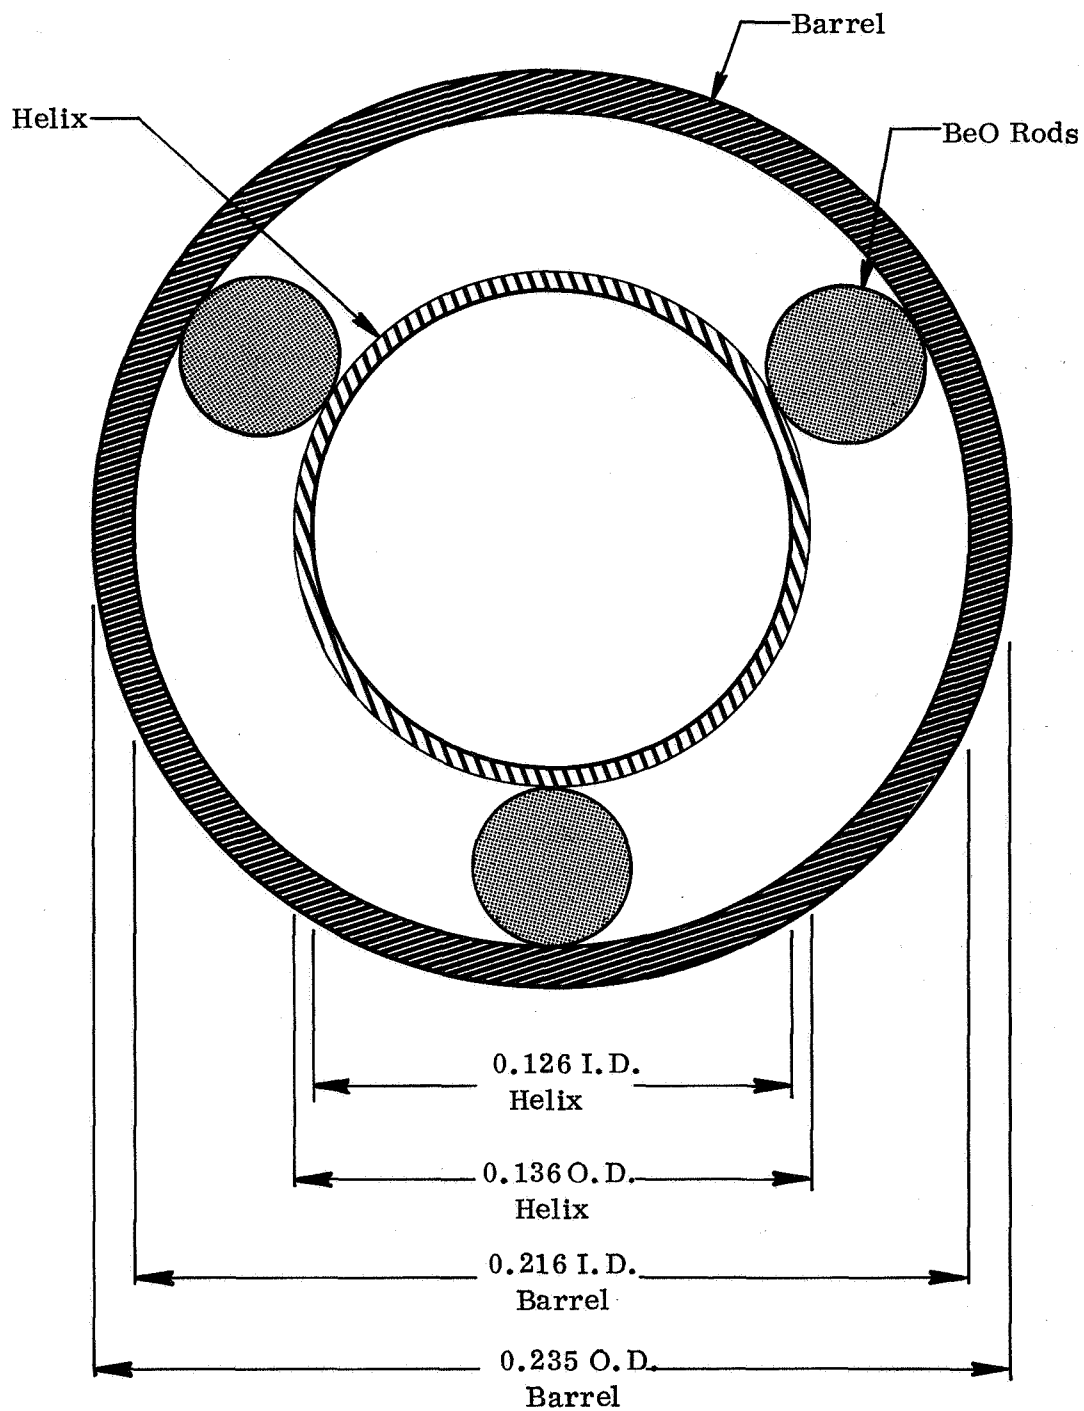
Cross sectional drawing of .015 x .005 inch tape helix supported by .040 inch BeO rods inside a .216 inch I. D. barrel.
